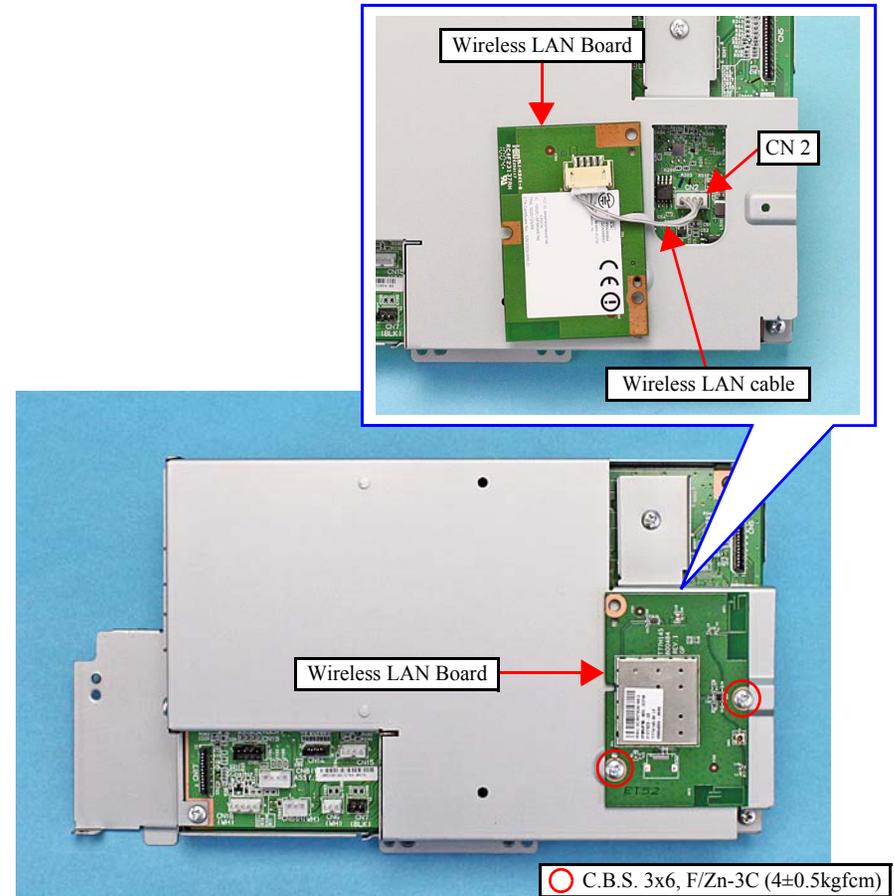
Removing the Wireless LAN Board (WorkForce 325 series)
